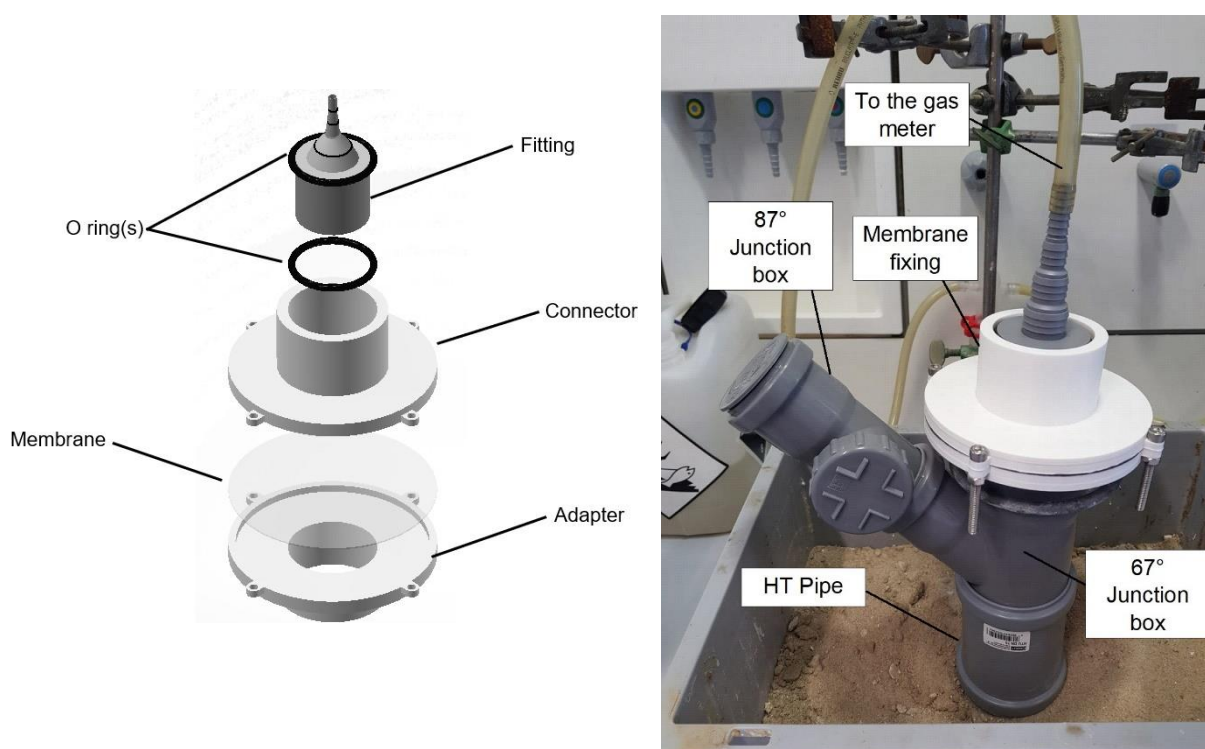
Exploded assembly drawing (left) and photo (right) of the membrane test setup.
